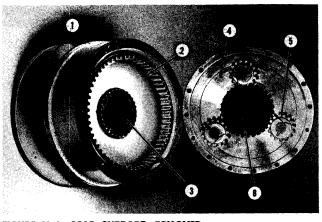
GEAR SUPPORT, REMOVED 1. Wire Rope Drum 3. Output Shaft 2. Internal Gear 4. Gear Support
